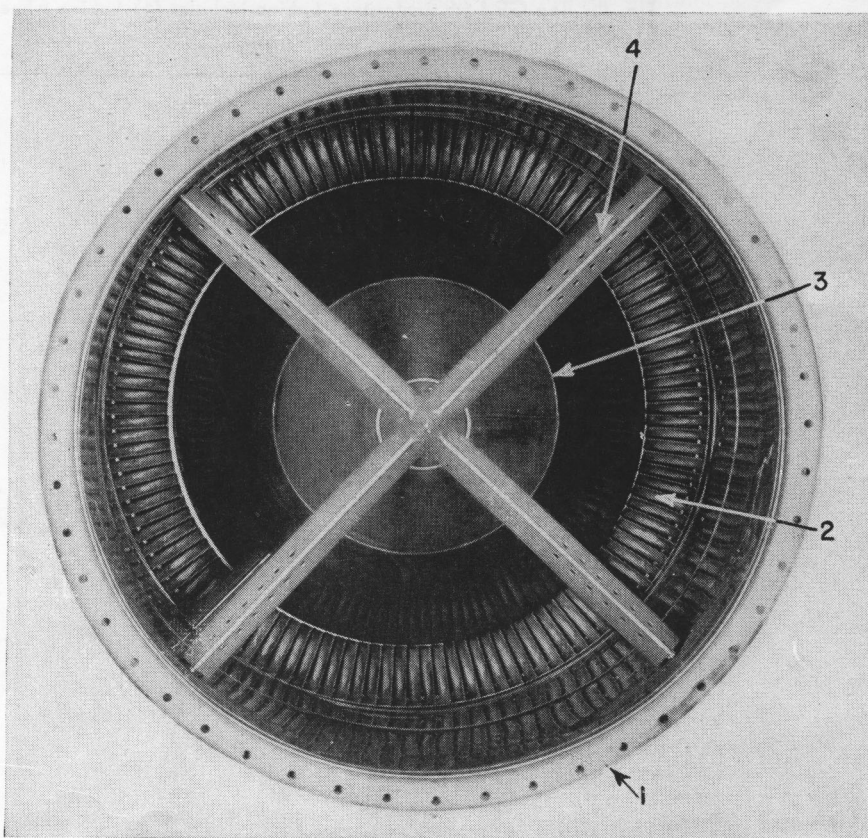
Rear view of the exhaust cone of the TG-180: (1) exhaust flange; (2) turbine buckets; (3) inner exhaust cone; (4) support struts.
